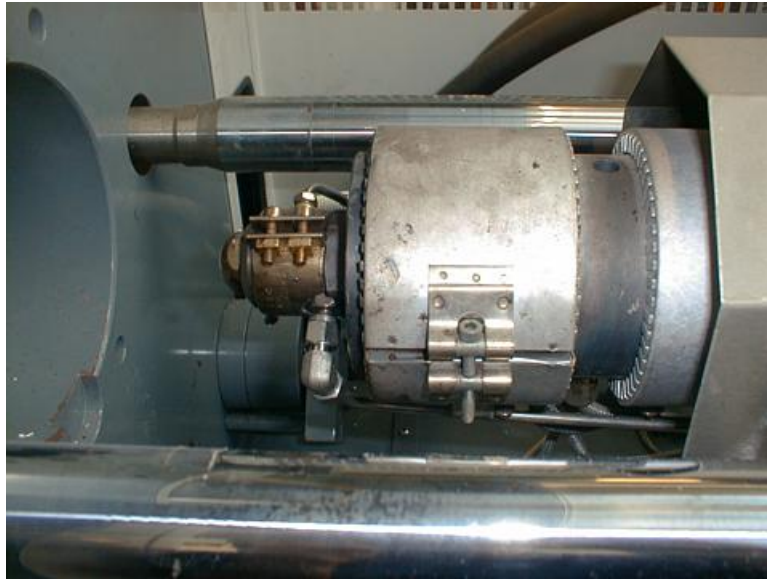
Specially designed gas nozzle fitted to the machine barrel
